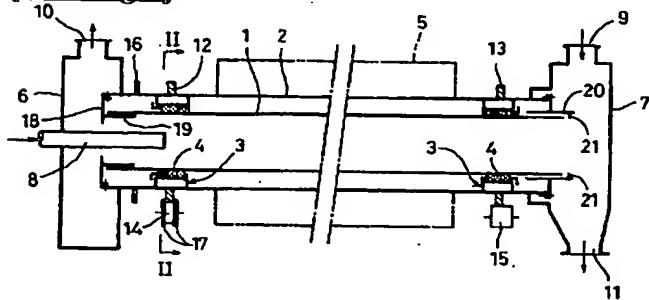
Drawing of longitudinal section showing a heat type rotary kiln outside everything but the former
